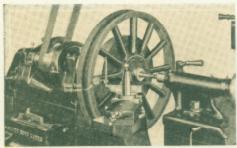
Wheels and Brake Drums Can be Tested and Machined When Diameter Does not Exceed 24"
